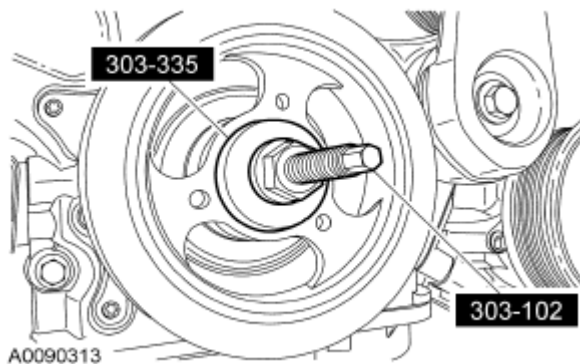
Installing Crankshaft Vibration Damper Using Special Tools (303-102, 303-335)
